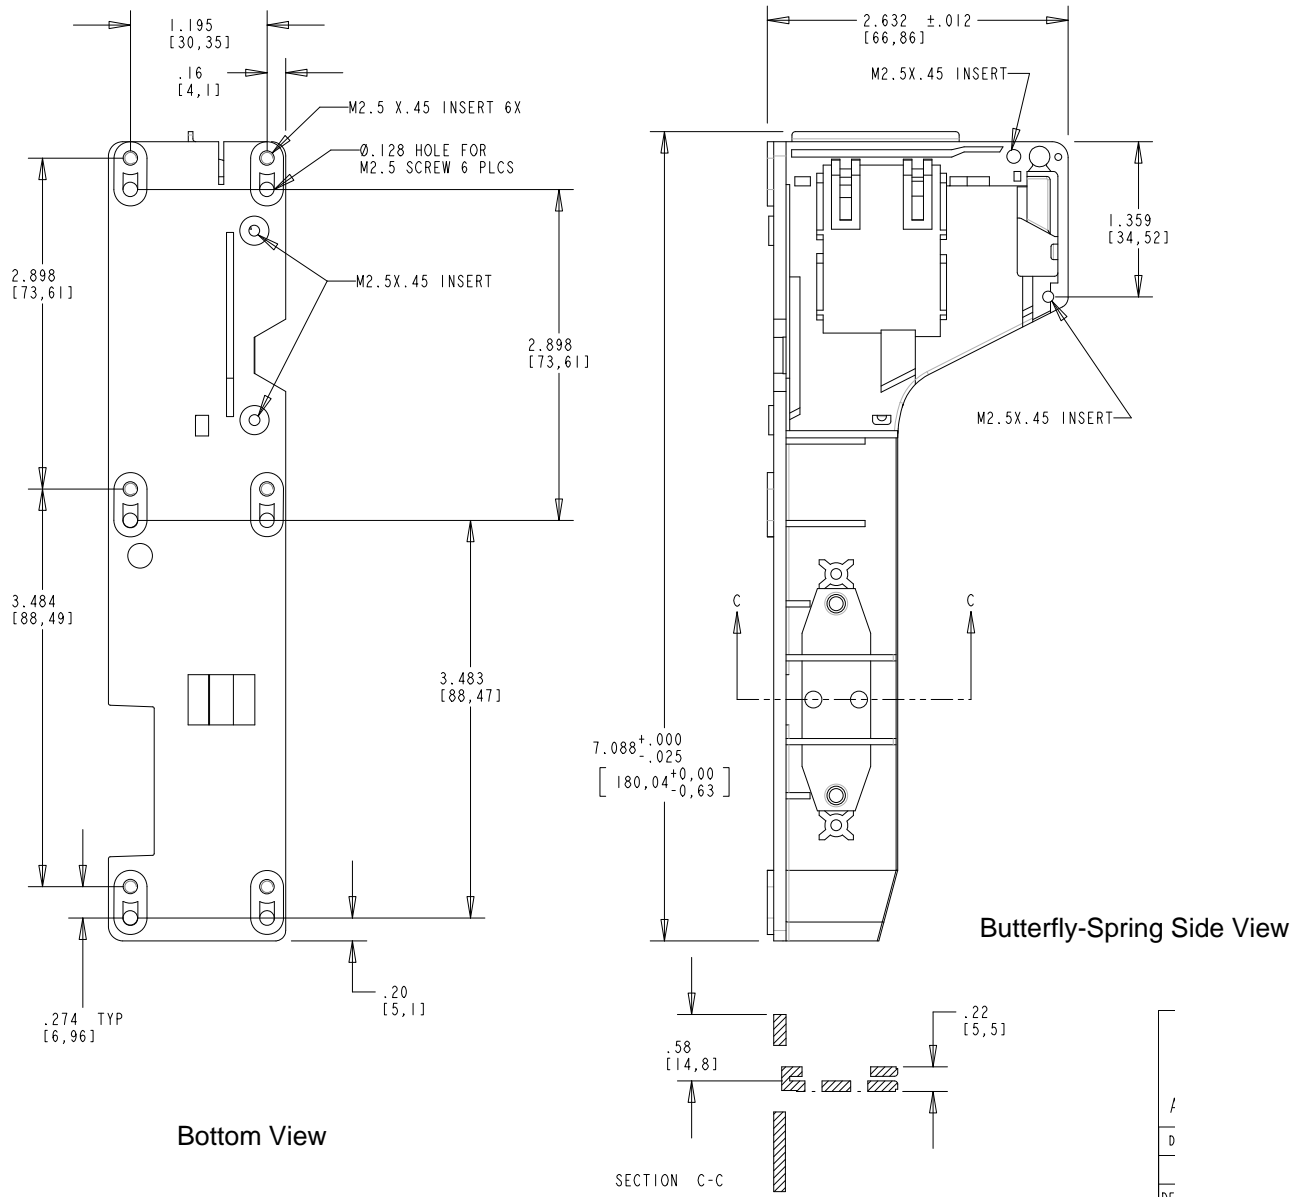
Swipe & Park – Bottom View and Butterfly-Spring Side View
